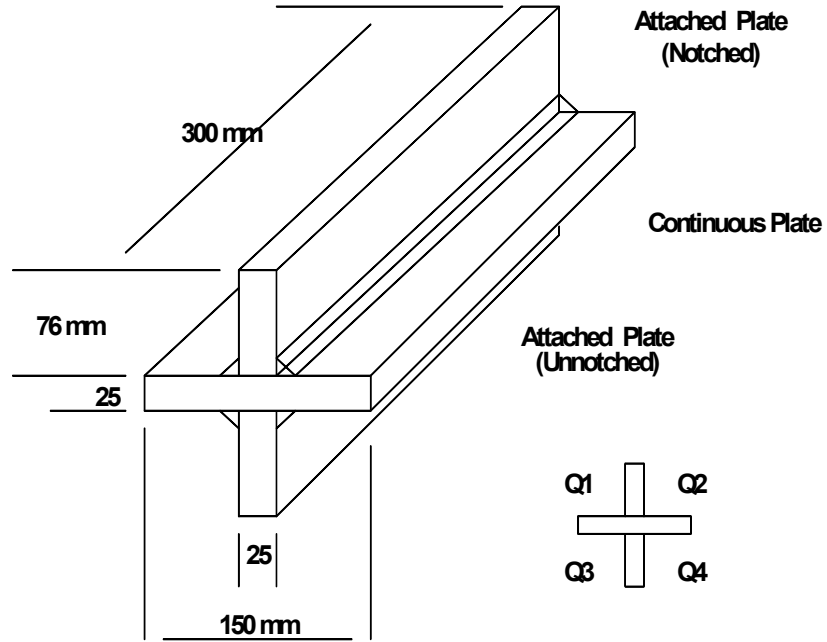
Schematic illustration of the slotted cruciform test weld assembly.
